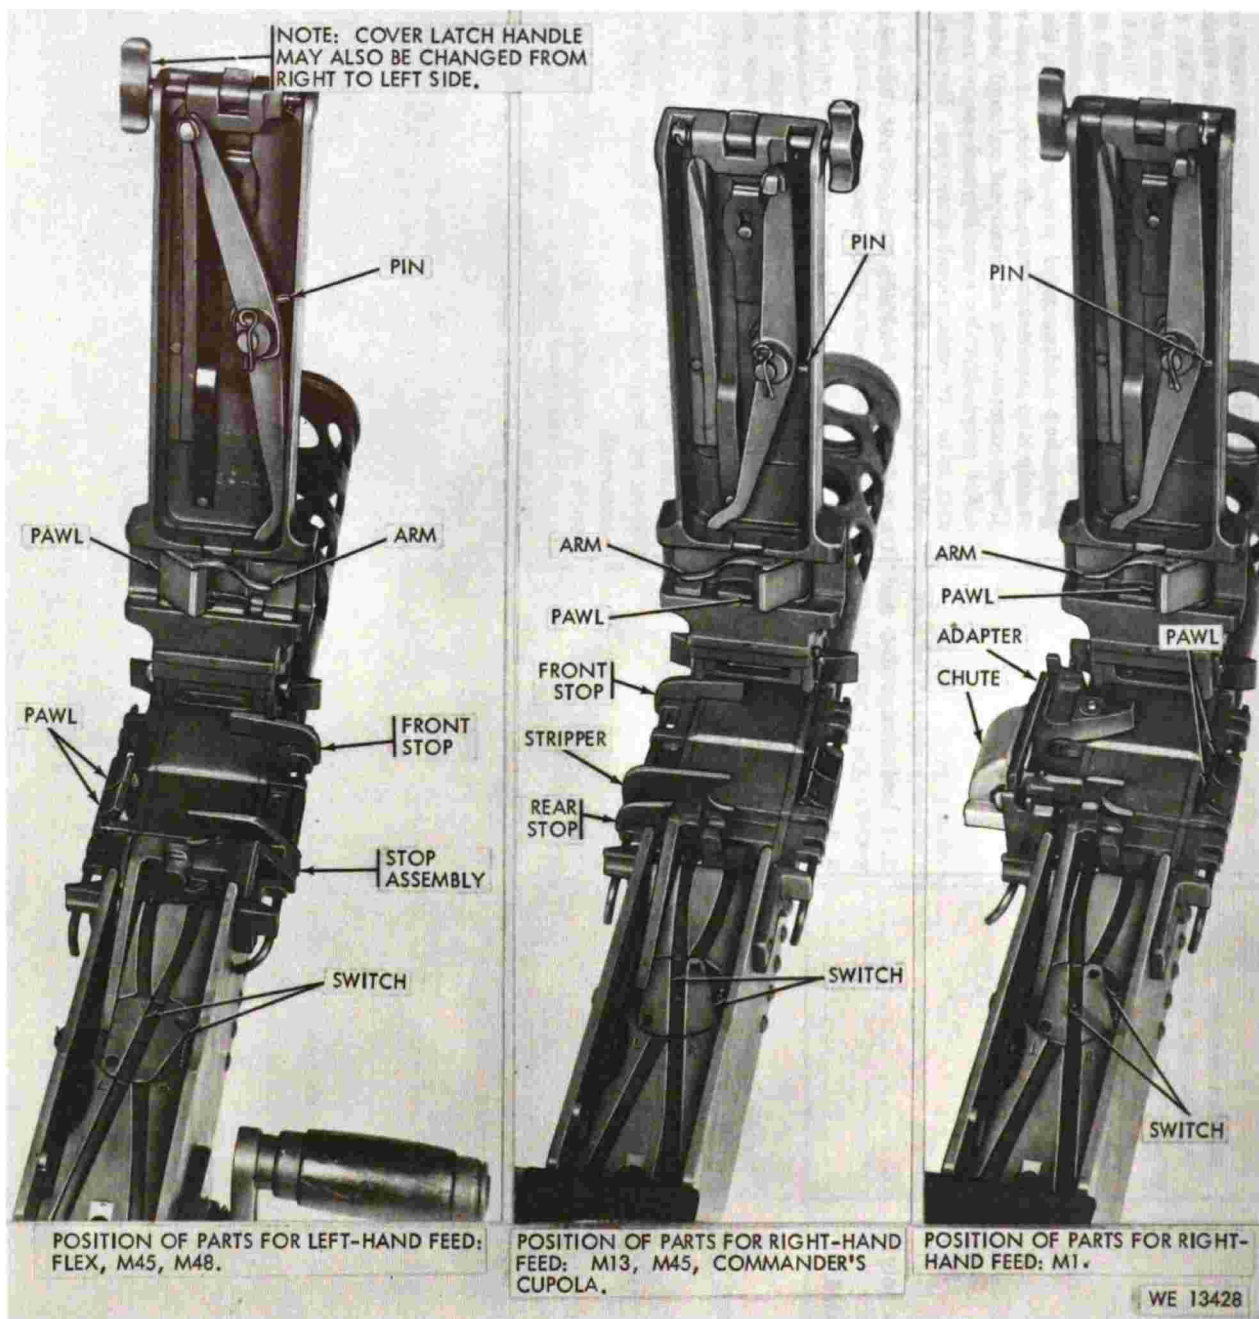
Configuration of machine guns showing left-hand positions (Flex, M45, and M48) and right-hand position of M1 with peculiar parts.
